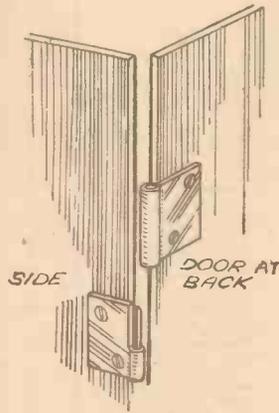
Detail showing method of fitting the back of the cabinet.
